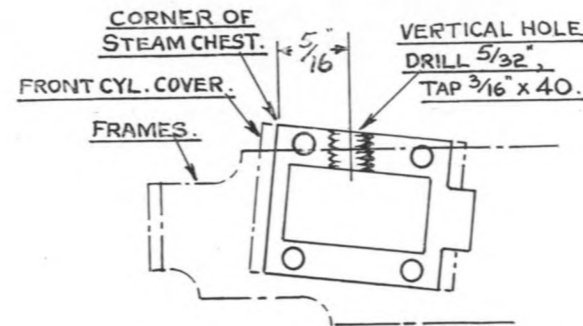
Showing the position of the steam entry hole in the steam-chest, drilled with the cylinder-block in the frames.
